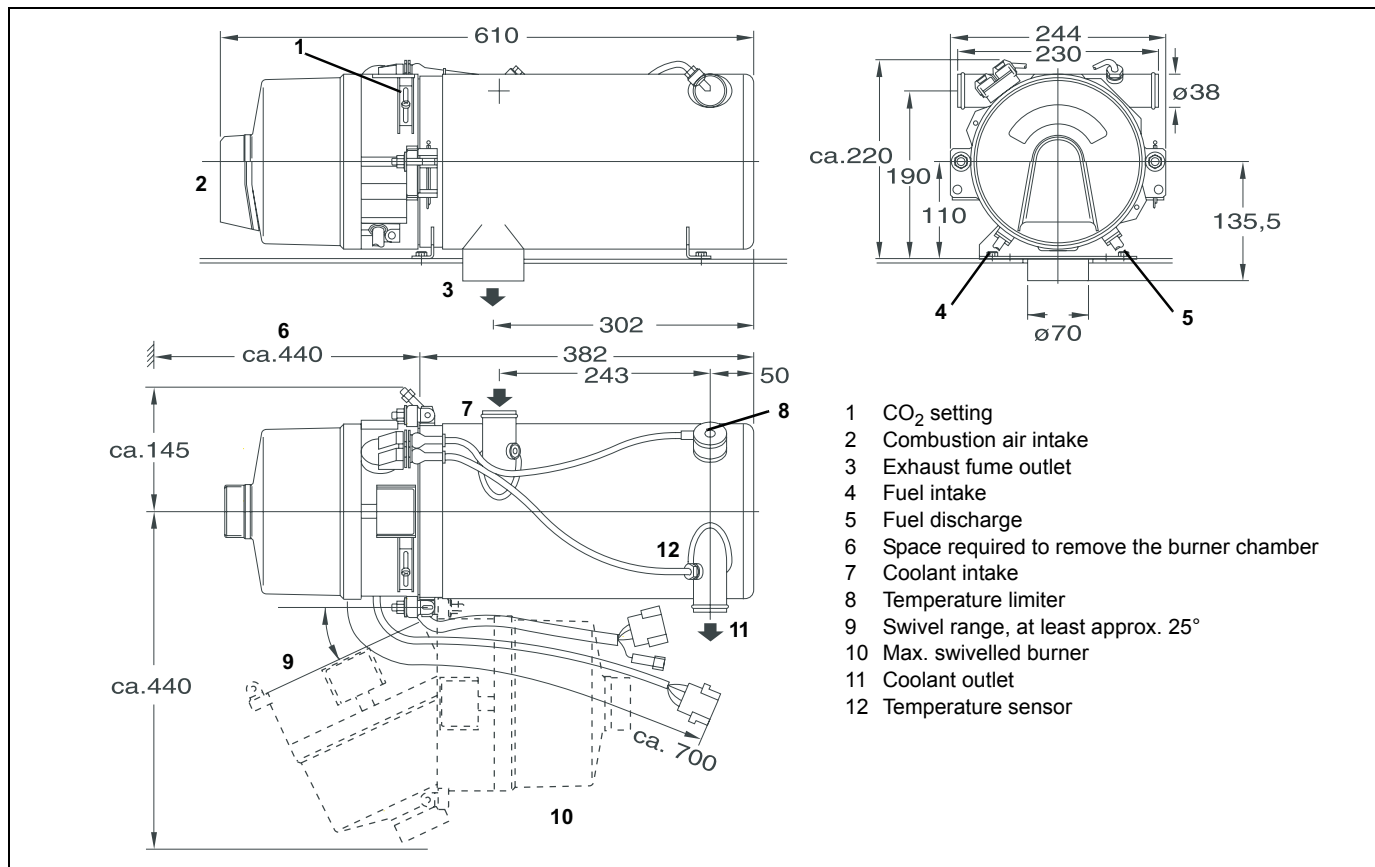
Dimensions of the Thermo 230 / 300 / 350 heater (horizontal installation)
